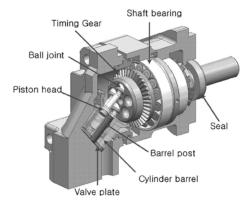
Schematic diagram of bent-axis type hydraulic piston pump with timing gears
